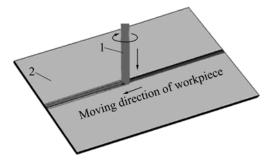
Basic principle of rotating extrusion (1 Extrusion head; 2 Welded piece)
